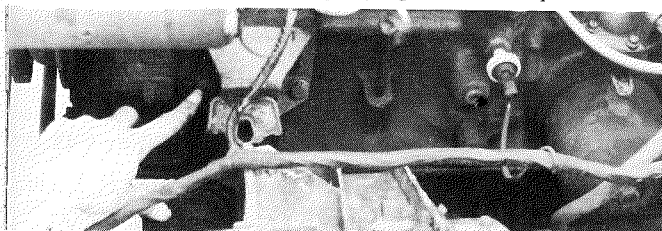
This shot shows at an earlier stage just where the filter housing bolt fits. Simply unscrew the original mounting plate bolt
